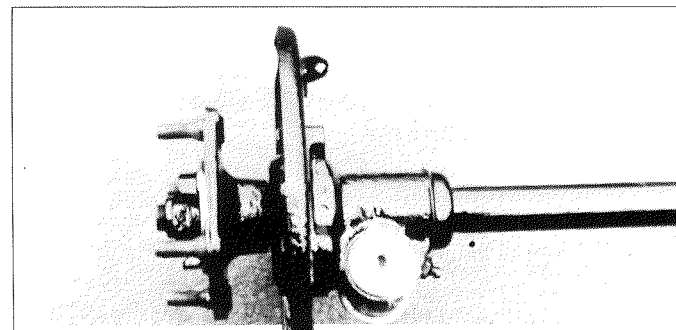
Finally tap back the flinger to provide a working clearance with the end of the bearing housing. Fit a grease nipple and pump grease into the housing. The outlet for the grease is a small 1/16th hole drilled into the top of the bearing housing. Unfortunately this becomes blocked with paint/dirt etc and the grease usually overflows past the needle bearing, seal and flinger.
